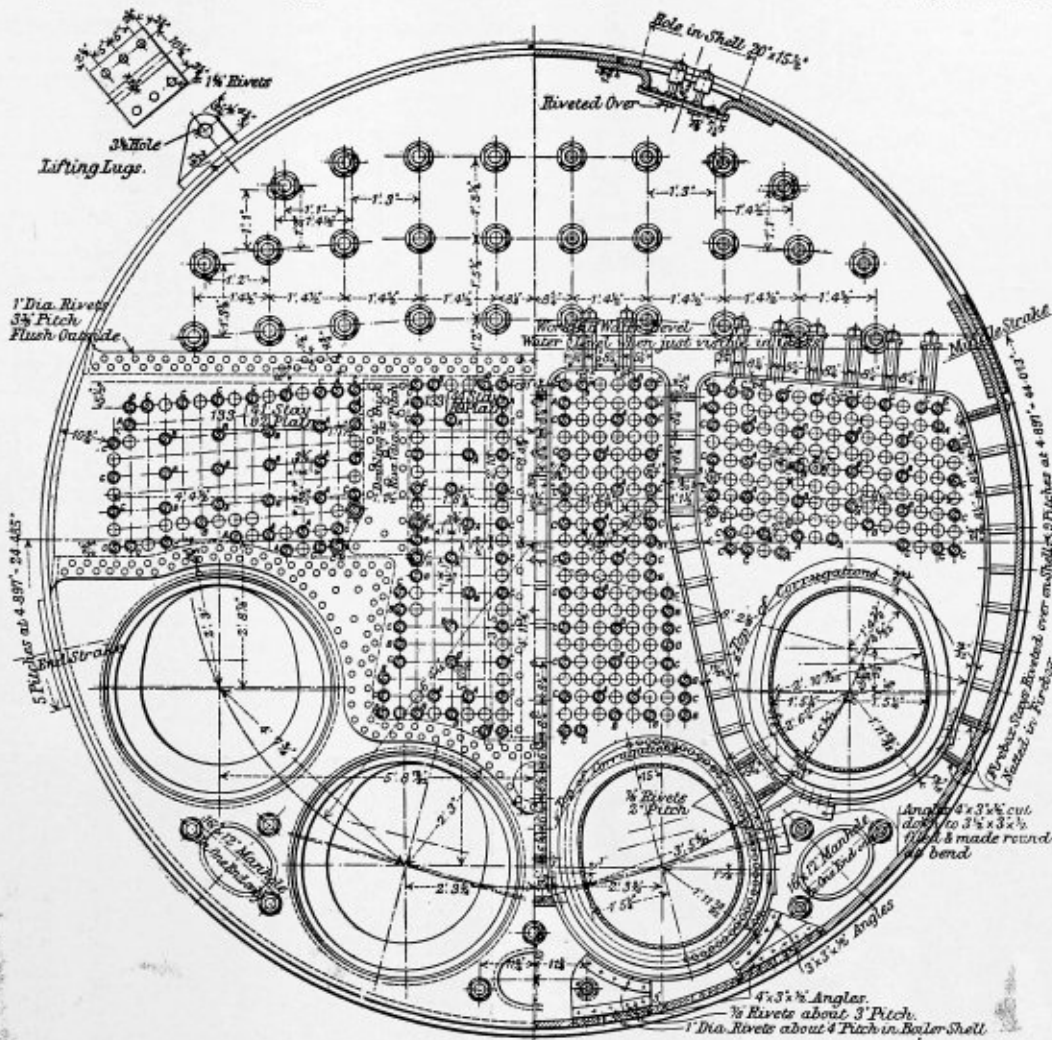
End View and Section of Boiler for the *Aquitania
